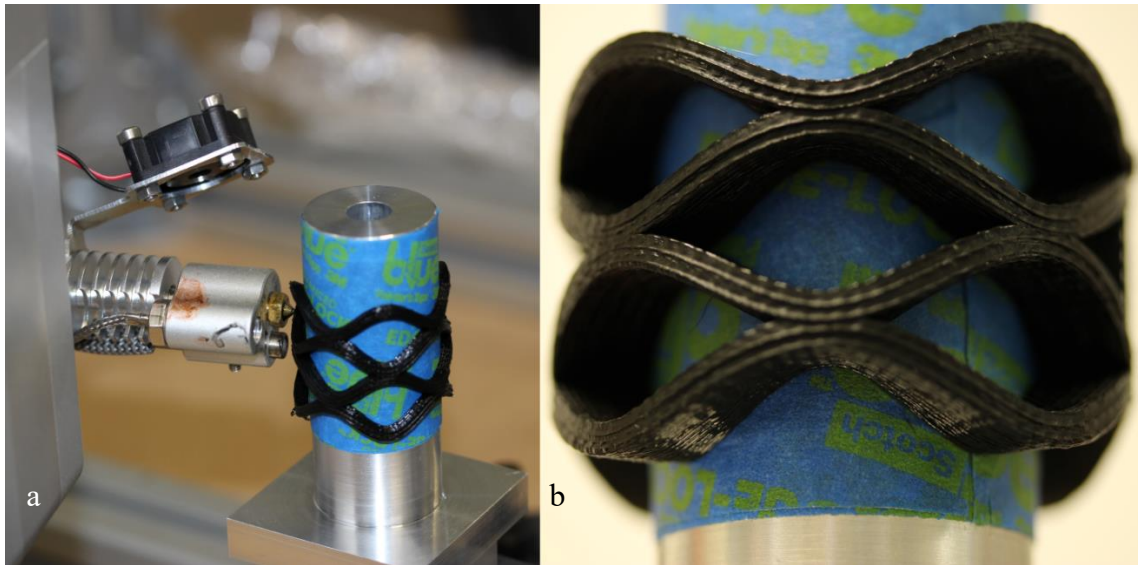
A sample produced via 5-axis ME: (a) during manufacture, and (b) after manufacture
